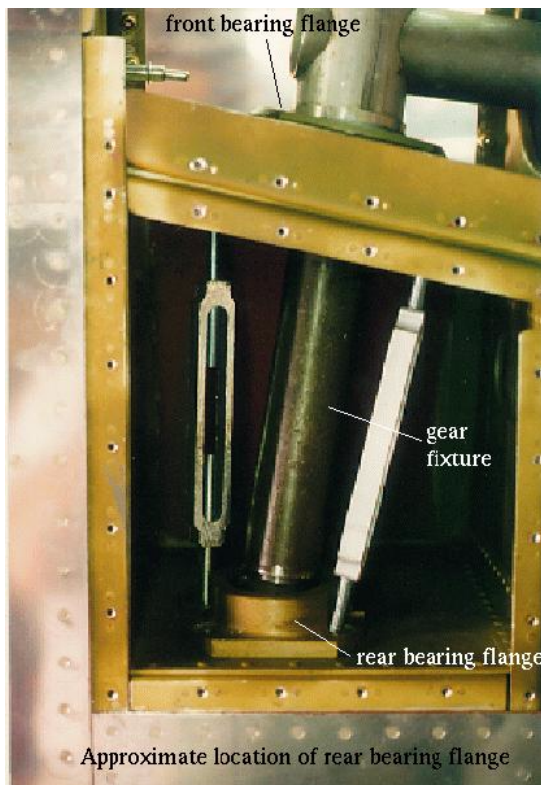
The approximate location of the rear bearing in the right wing. At this stage the fixture works better than the trunion assembly. It's much lighter and easier to clamp in position.
